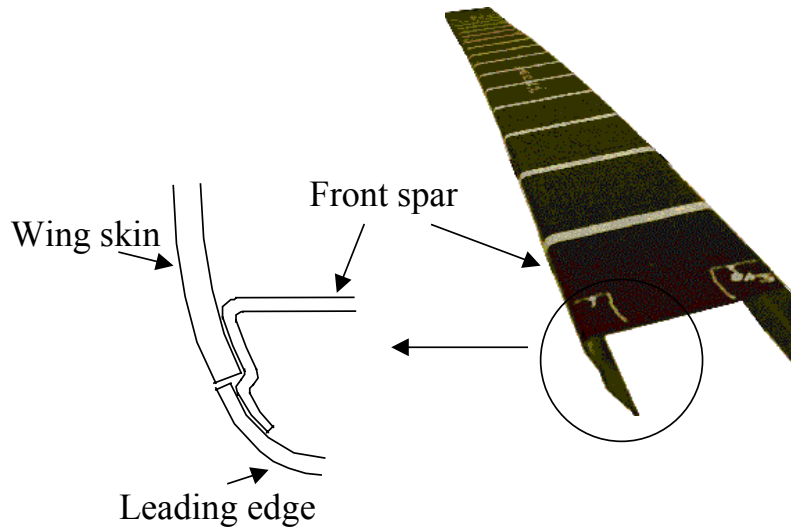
Photograph of a pre-production spar (right), and a schematic of the front spar attachment to the wing skin and the leading edge (left).
